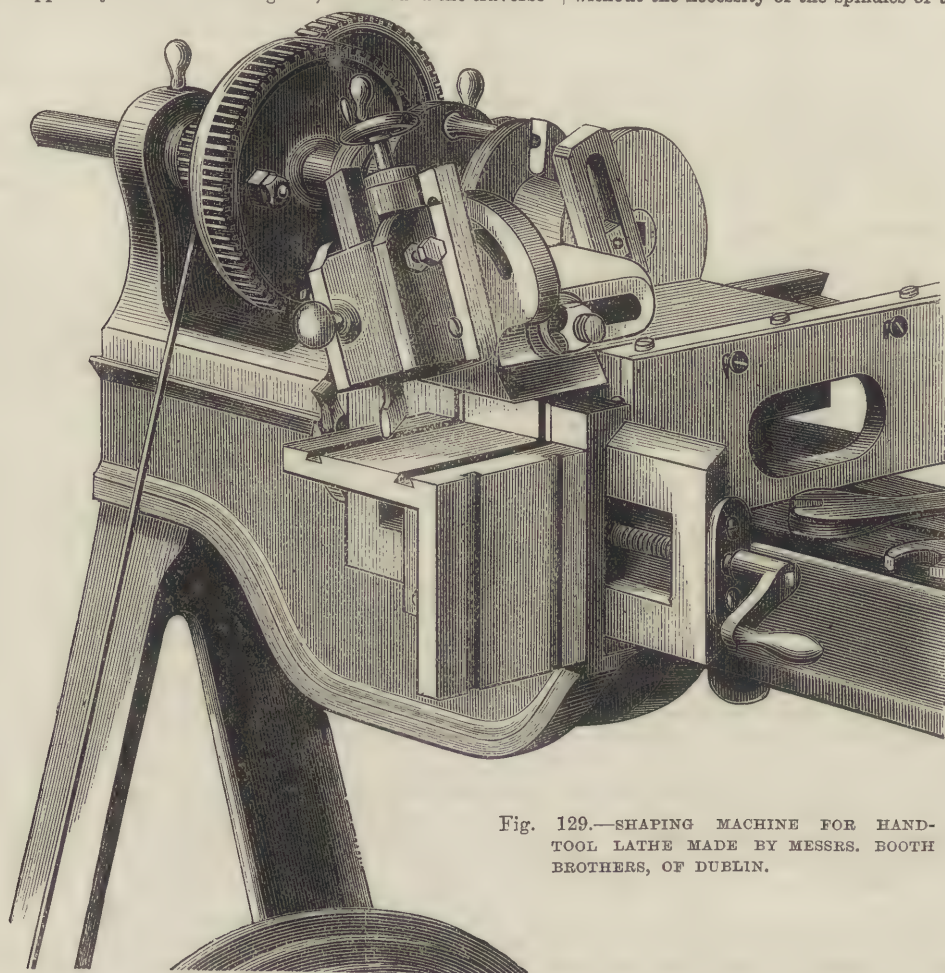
SHAPING MACHINE FOR HAND-TOOL LATHE MADE BY MESSRS. BOOTH BROTHERS, OF DUBLIN.
